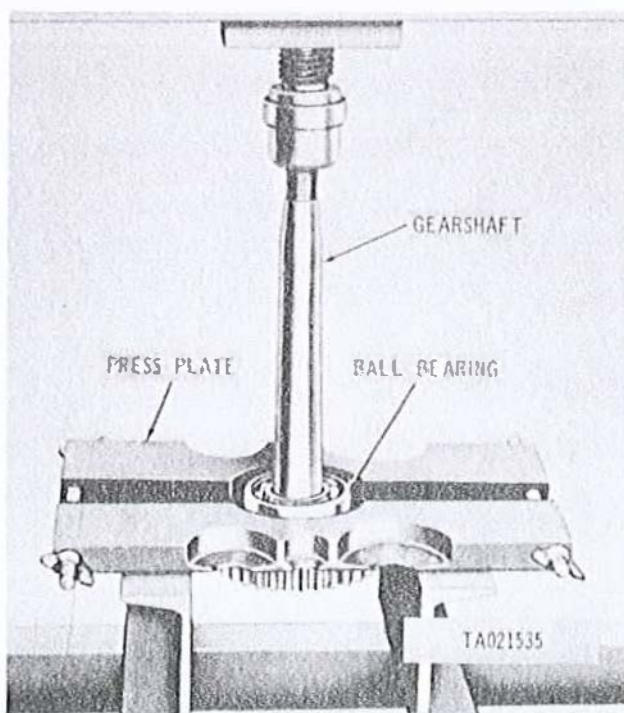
Removing fuel injection pump gearshaft ball bearing.
